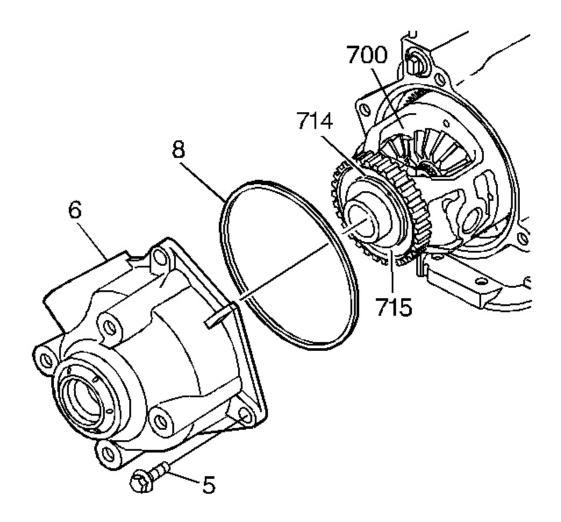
View Of Case Extension Assembly & Bolts Courtesy of GENERAL MOTORS CORP.
